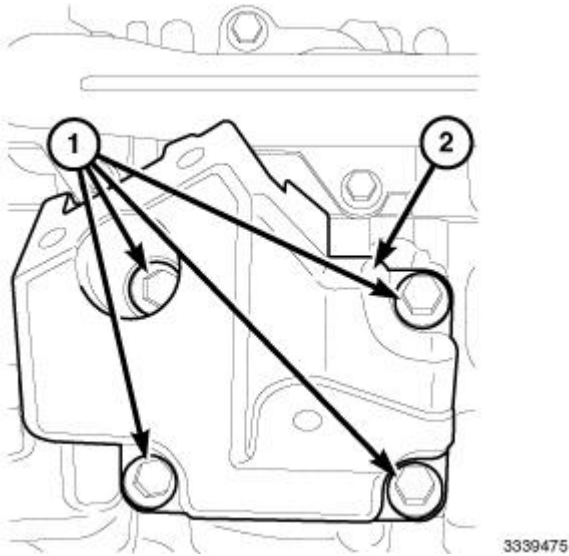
Engine Mount Isolator Bracket & Retaining Bolts
